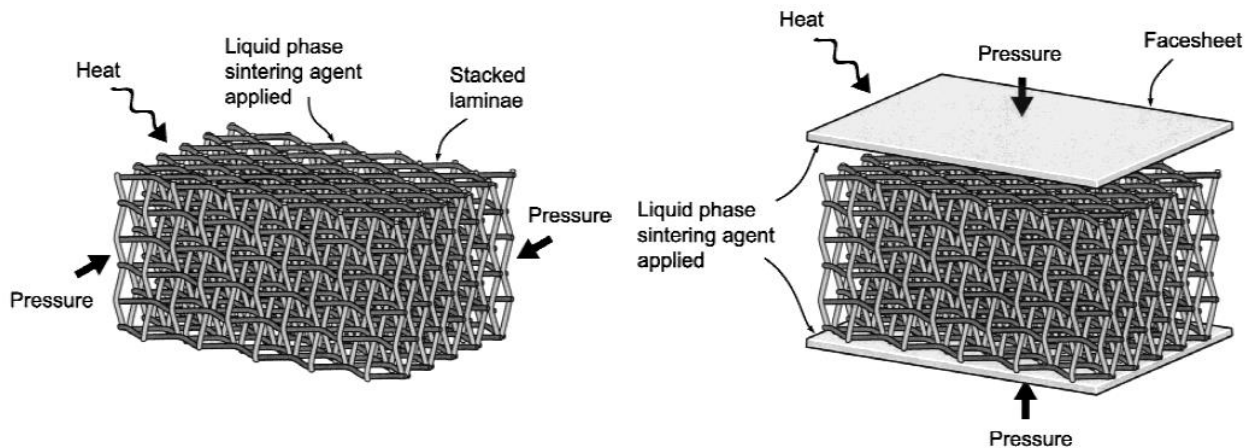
Woven metal textile layup technique to fabricate lattice-truss architectures. Circular wires are woven into a plain square pattern to form individual laminae. The laminae are stacked together in an aligned arrangement and bonded at the points of contact to form a diamond textile lattice-truss core, to which face sheets are subsequently bonded. [8]
